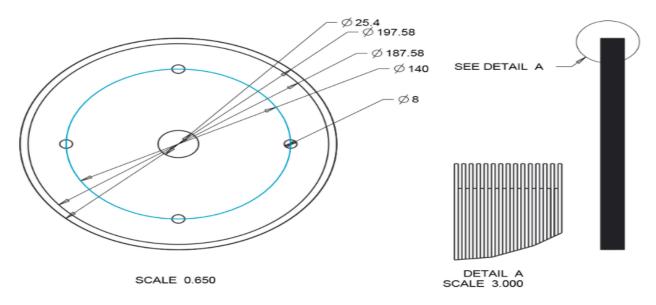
Engineering Drawing of the fabricated labyrinth seal; all dimensions in mm.
